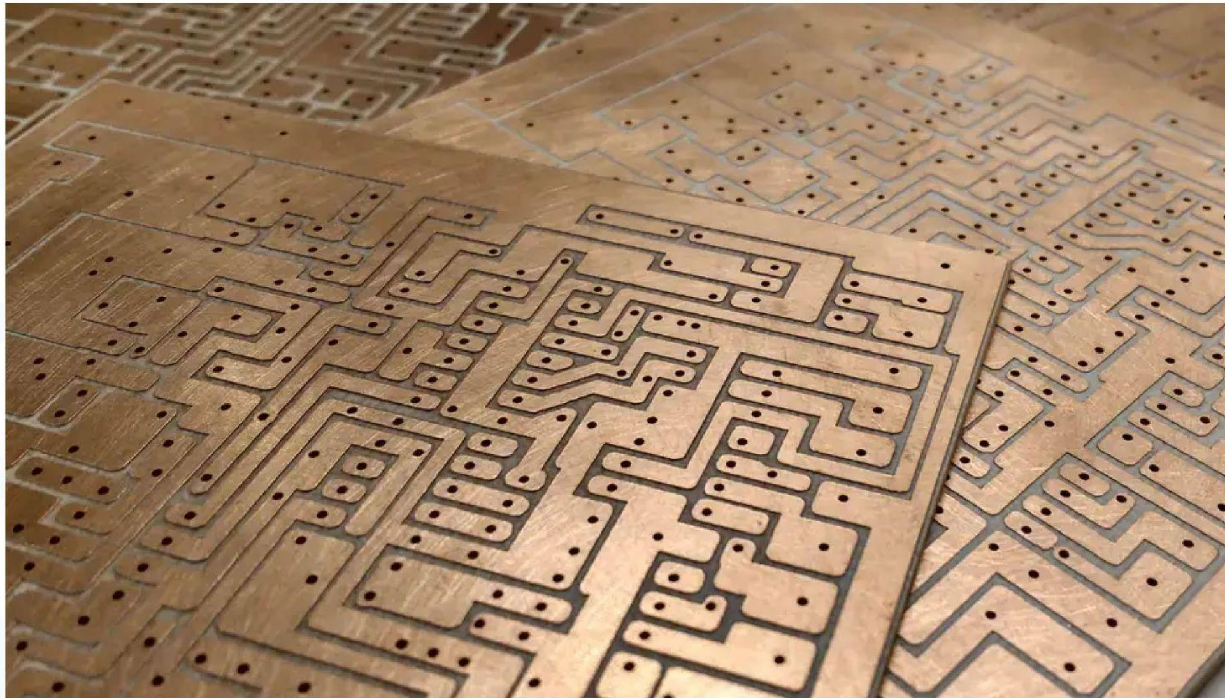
PCB without weld mask. Source: *Mazzo* <<https://www.mazzo.me/en/posts/pcb-milling-mpcnc/>>.
